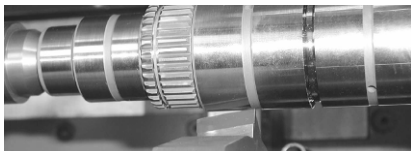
Special shaped turning tool (middle) during machining of a sealing surface [5].
